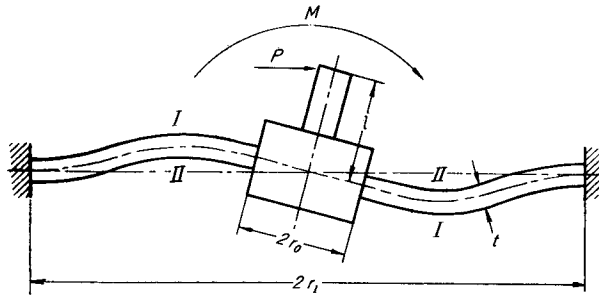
Schematic view of deflection of the tool dynamometer due to the principal or feed cutting force.
